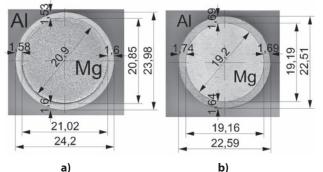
Shape and dimensions of bimetallic bars after explosive cladding (cross-section): a) sample no. 1, b) sample no. 2
